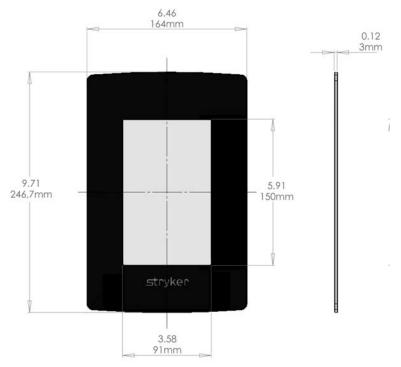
Dimensional drawing, front view touchscreen wall control unit, SK enclosure integrated (dimensions are in inches/mm)
